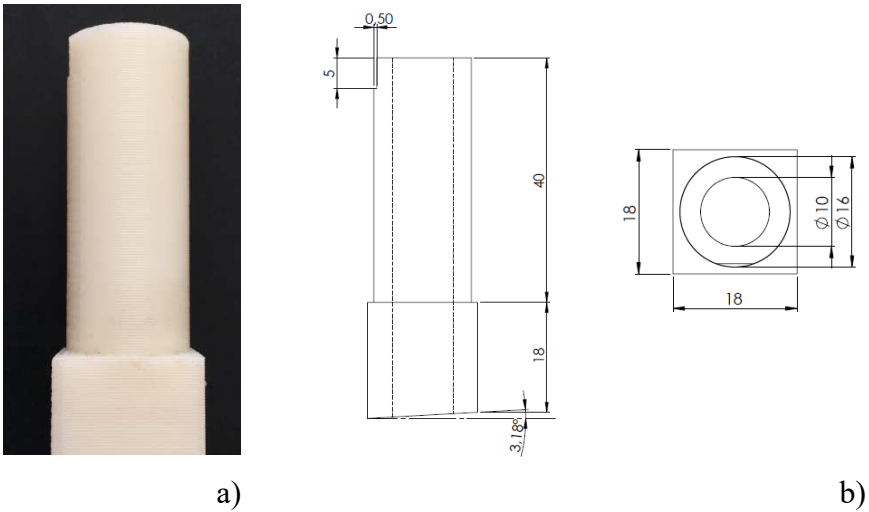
Test object designed and manufactured for the experimental investigation. a) image of the test object after production and removal of supporting materials, b) technical drawing of the test object with nominal dimensions.
